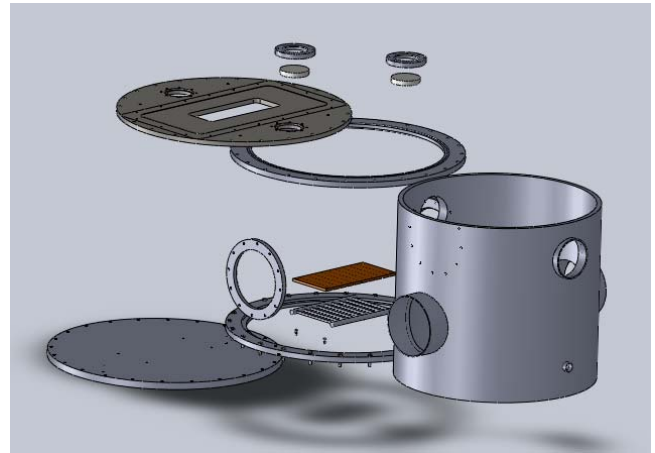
3-D exploded view of HUNTER vacuum vessel.
